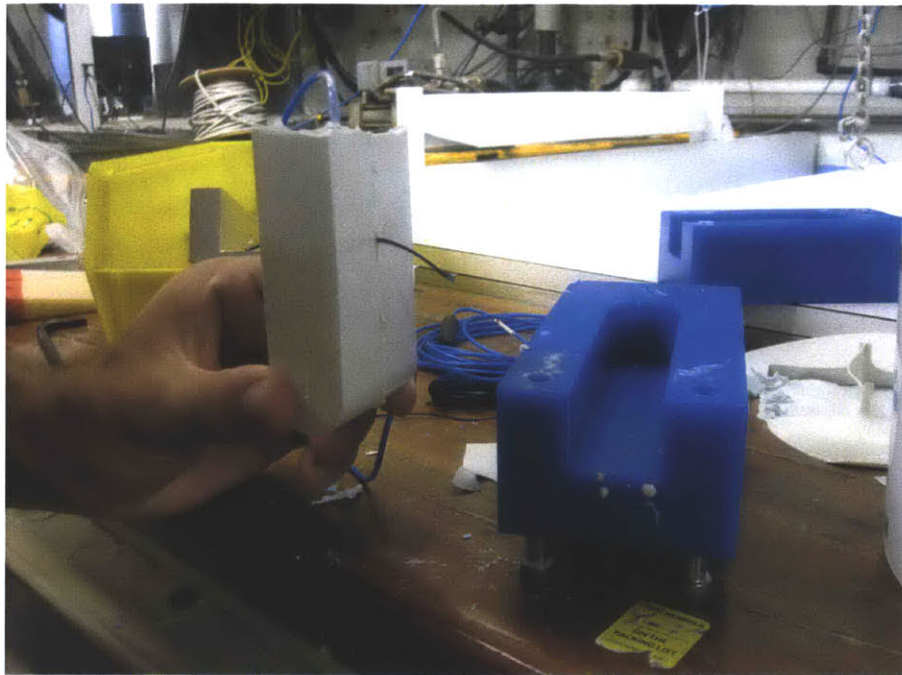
The resulting block of rubber with the embedded accelerometer (shown above) served as a proof of concept for the Kevlar string mounting scheme which would be used in a modified manner later on the full scale mold.
